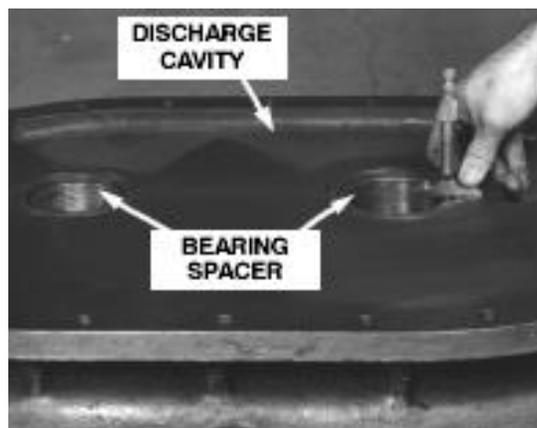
DISCHARGE END BEARING CARRIER
